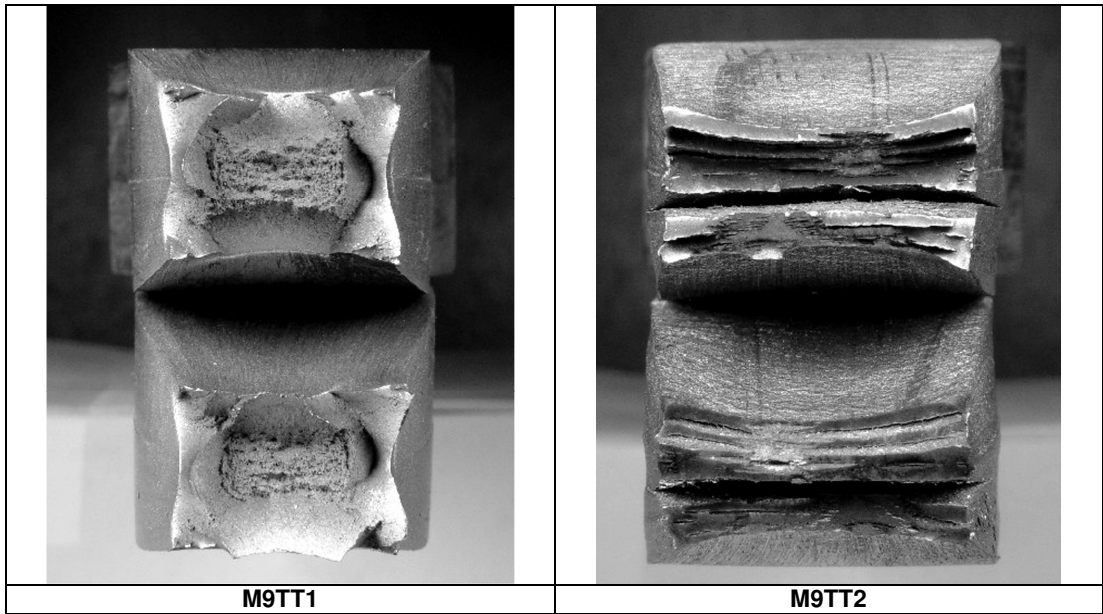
Fractographs of M9TT1 and M9TT2 specimens.
